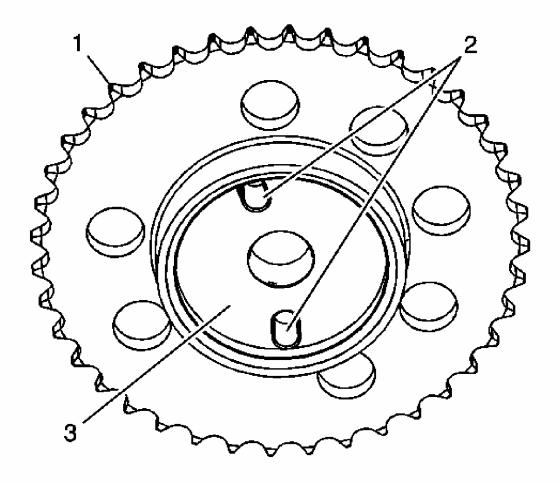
View Of Inspection Areas Of Back Of Left Exhaust & Intake Camshaft Sprockets
